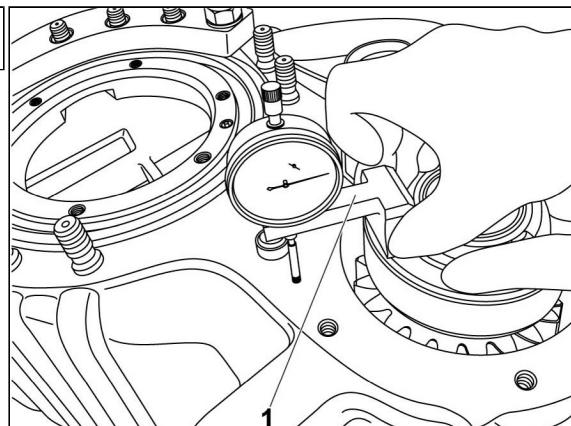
Measurement of the distance from the bearing to the housing face
